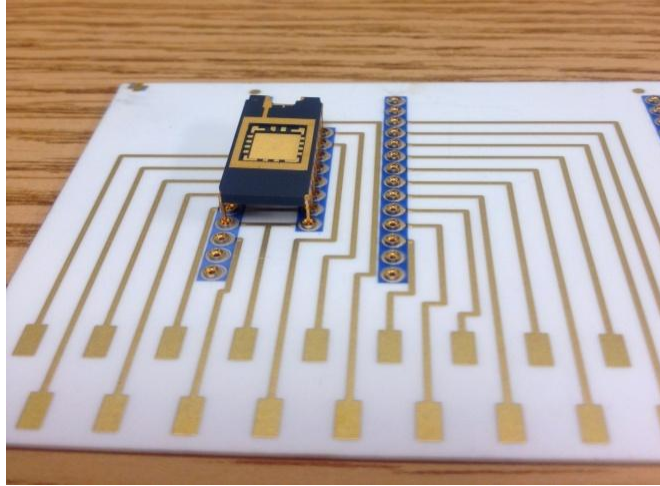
Assembled DIP Socket Board with Inserted DIP Package
